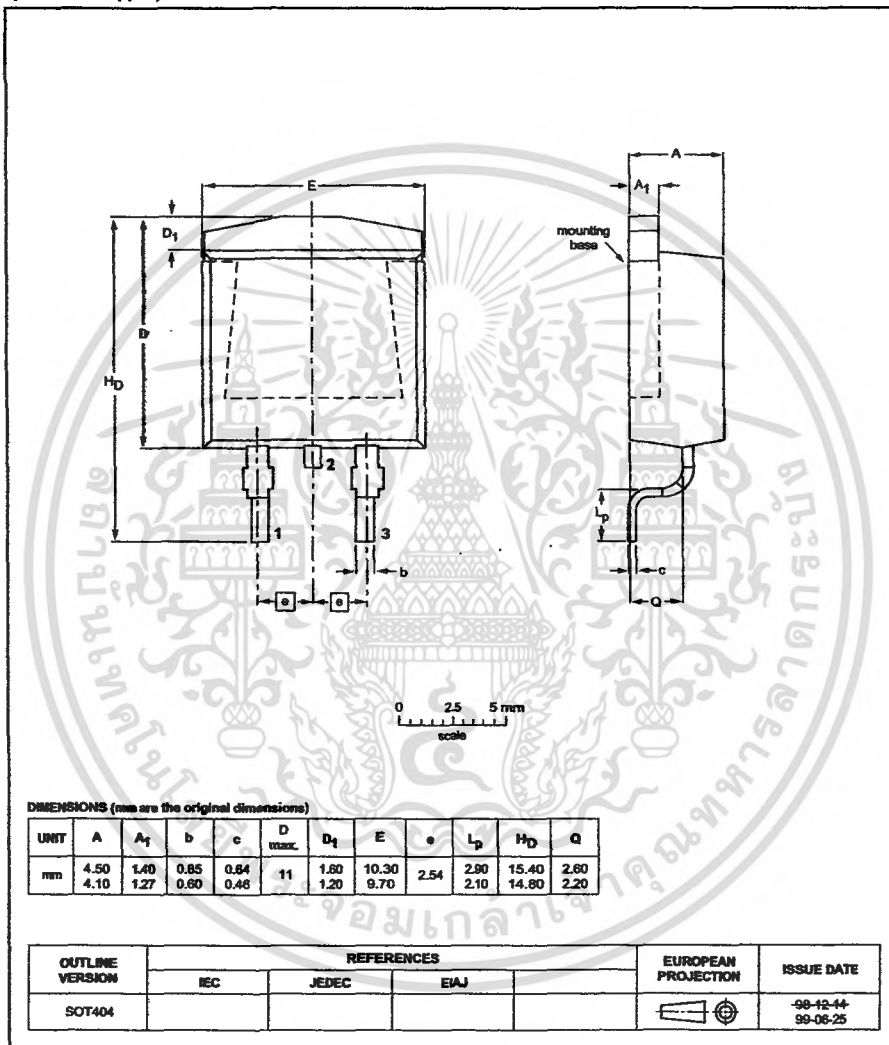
SOT404 surface mounting package. Centre pin connected to mounting base.
